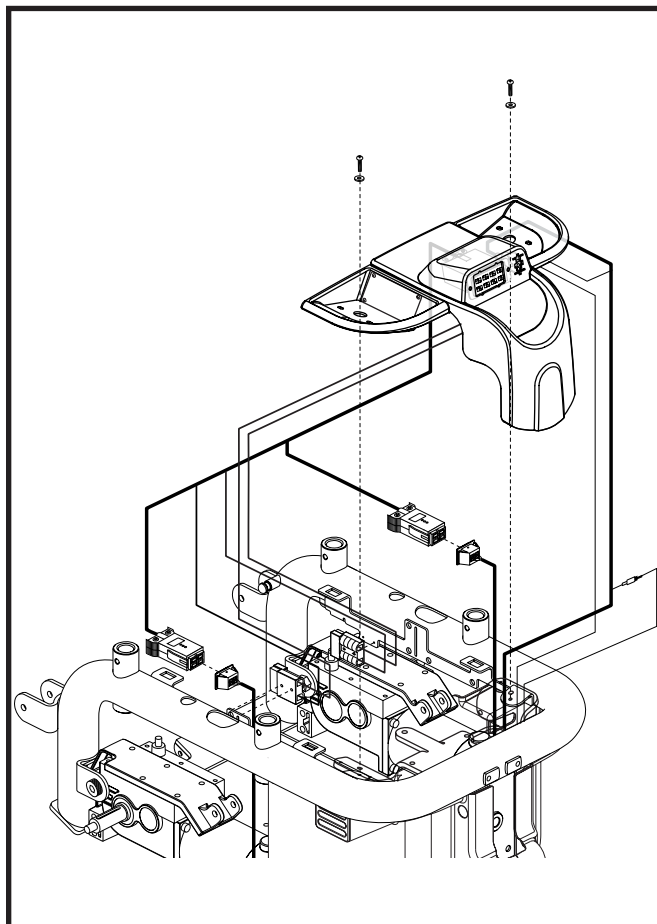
Jazzy 1121 Electronics Tray Assembly/Disassembly
